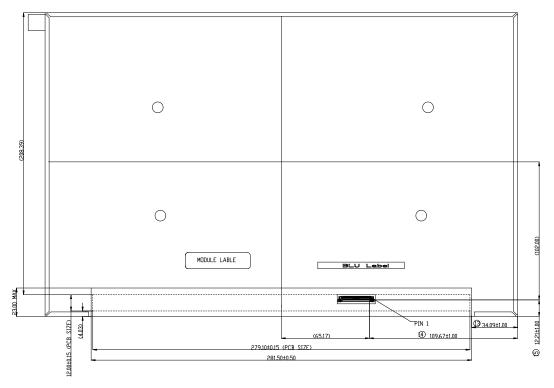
TFT-LCD Module Outline Dimensions (Rear view)
